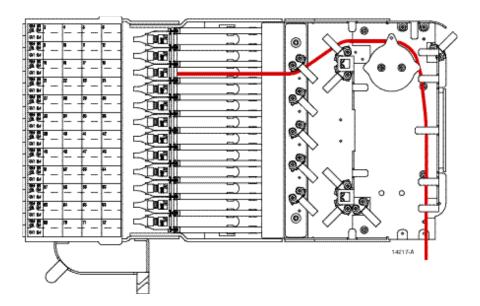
FOT Equipment Patch Cord Internal FTB Routing Detail - Bottom Entry
